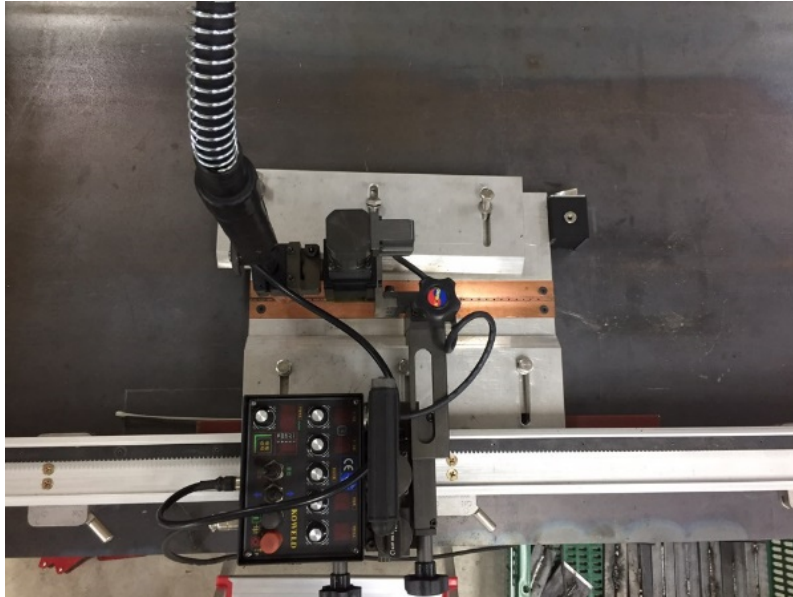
Welding speed controller Hiweld set on gear driven rail mechanism
